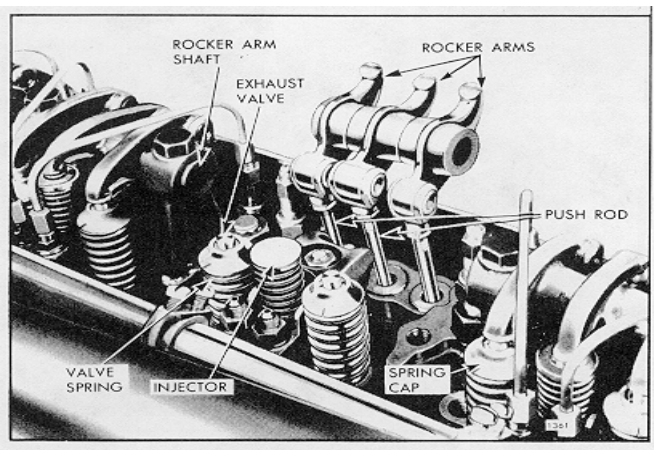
Valve and Injector operating Mechanism (Two-Valve Head)
